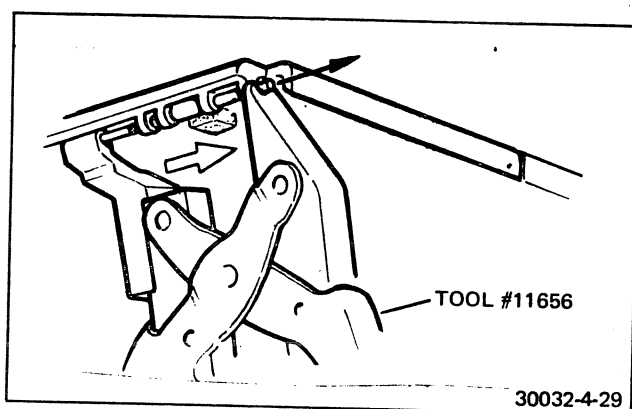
HINGE PIN REMOVAL TOOL
